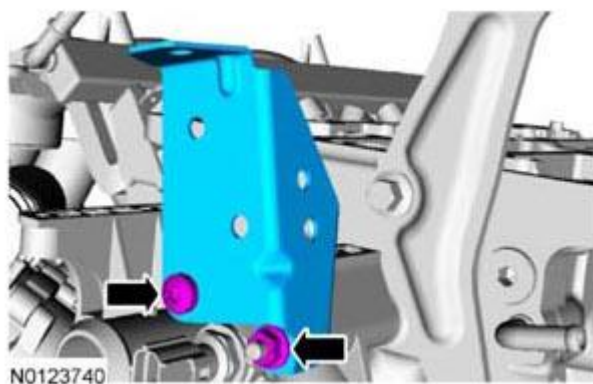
Locating Coolant Outlet Bracket Nut And Bolt
